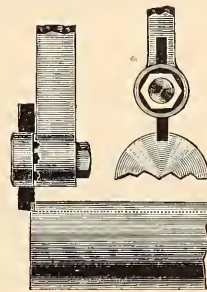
THE ARMSTRONG PLANER TOOL CUTTING A KEYWAY.
